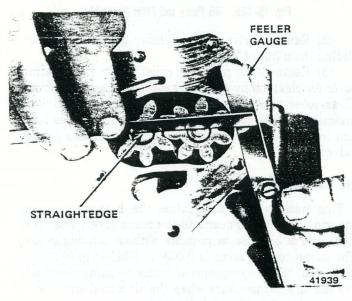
B-128 OII Pump Gear End Clearance Measurement—Feeler Gauge Method
